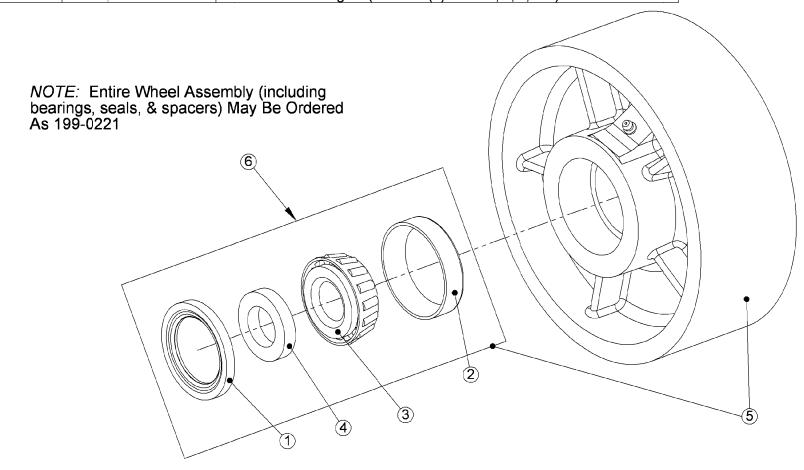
Henke 8" Steel Wheel Assembly
